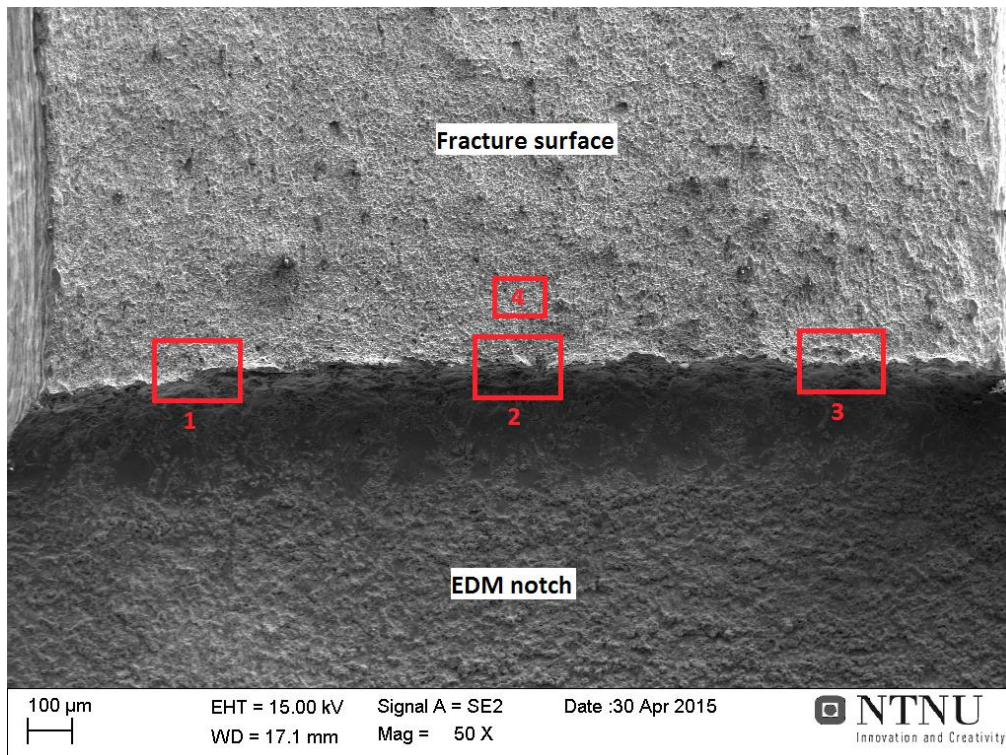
Sample A, test 3, fracture surface on clad section of specimen.
